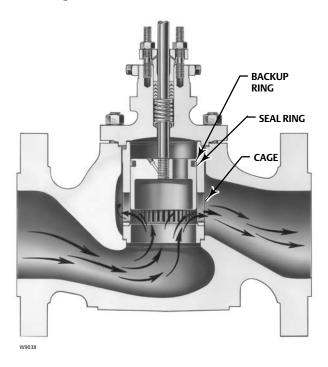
Fisher EWD Valve with Whisper Trim III Cage (shown with optional drain plug)
